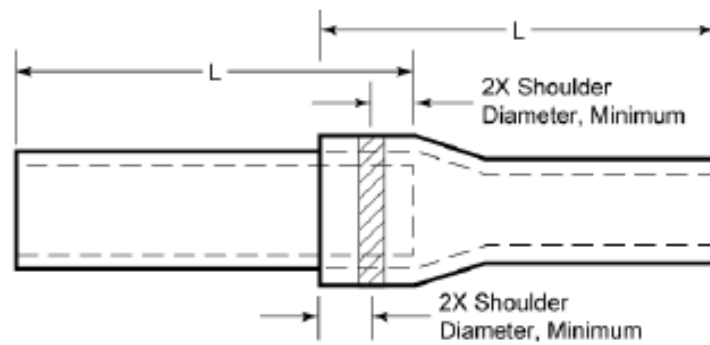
Square Groove Weld Test in Pipe
